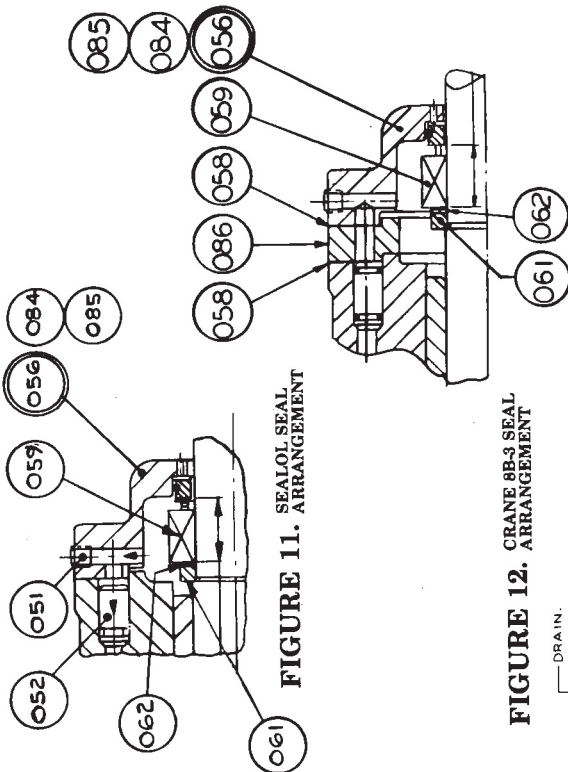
SEALLOL SEAL ARRANGEMENT
